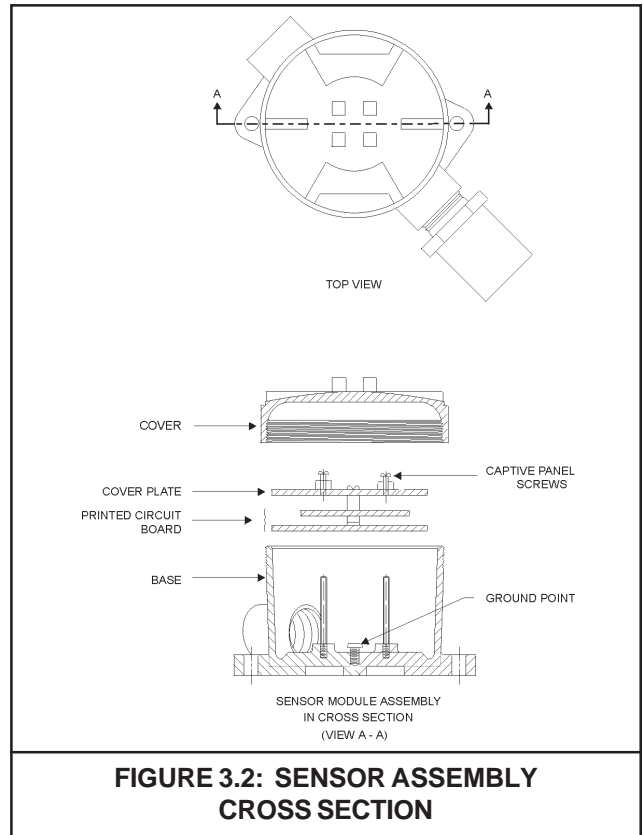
SENSOR ASSEMBLY CROSS SECTION
